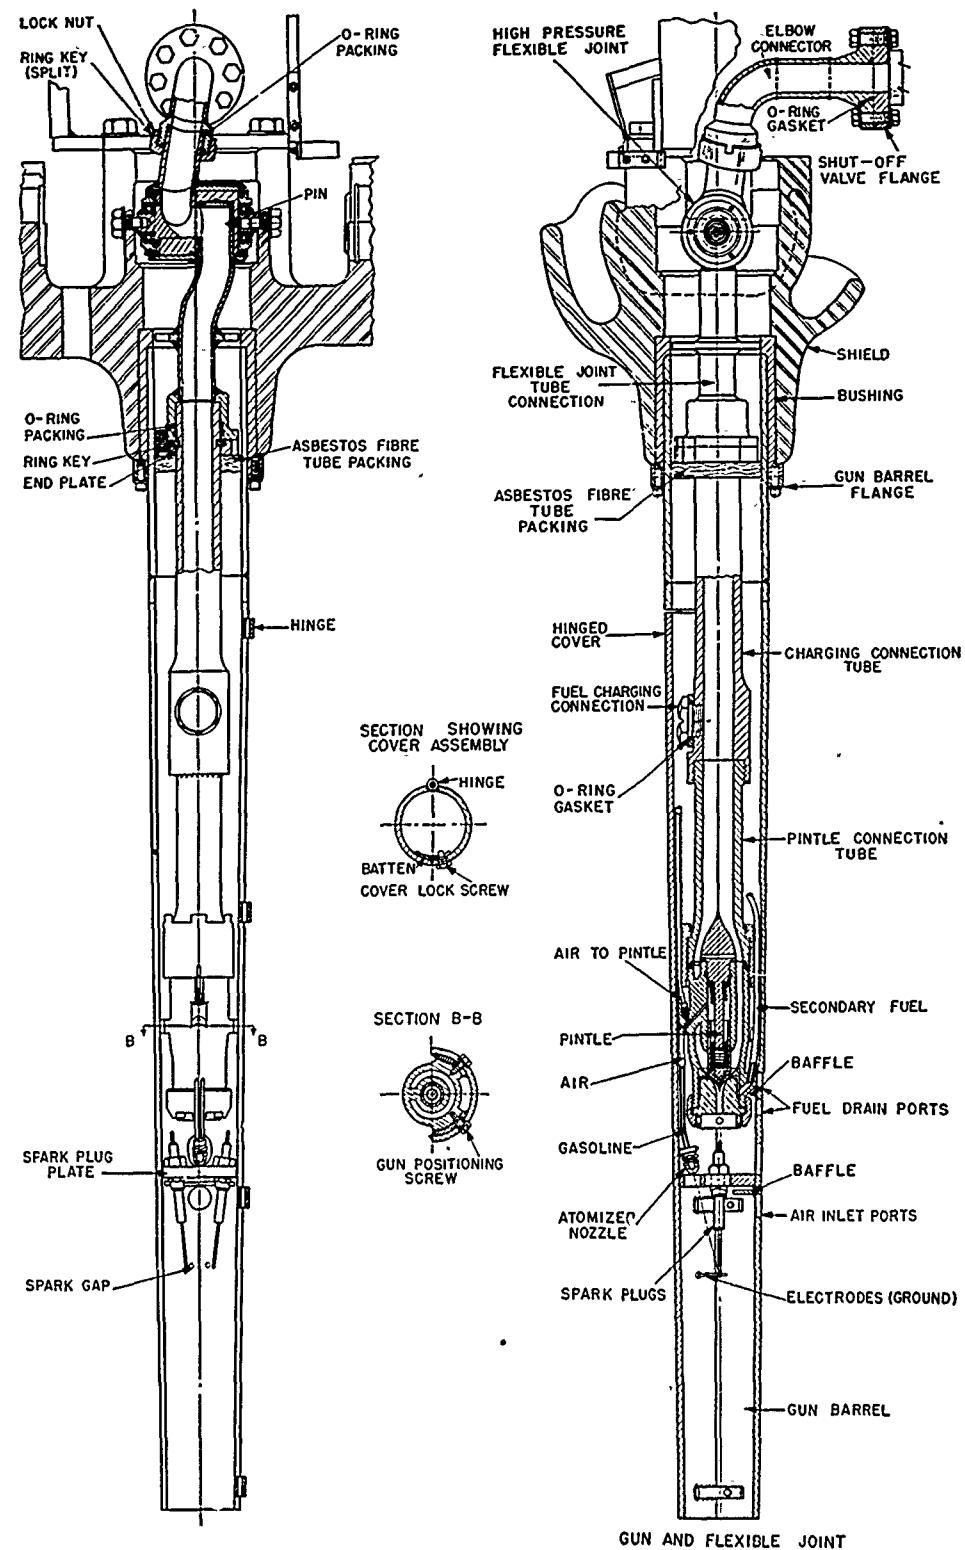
Cutaway of gun and flexible joint for E13R1-13R2 flame thrower.
